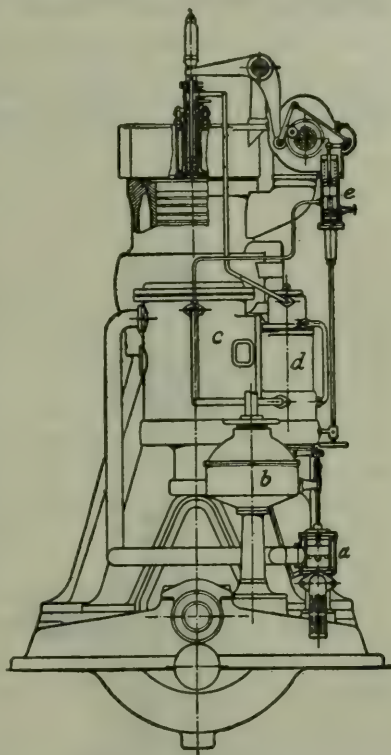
Patented throttling devices for Diesel engines. *a*, throttling valve; *b*, engine governor; *c*, scavenging pump; *d*, compressor; *e*, servo-motor.
